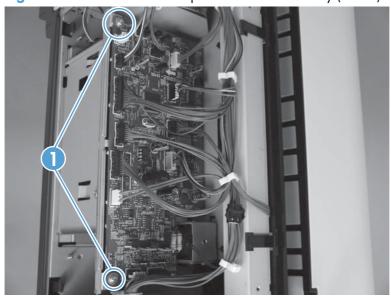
Remove the output bin 3 drive assembly (1 of 4)
